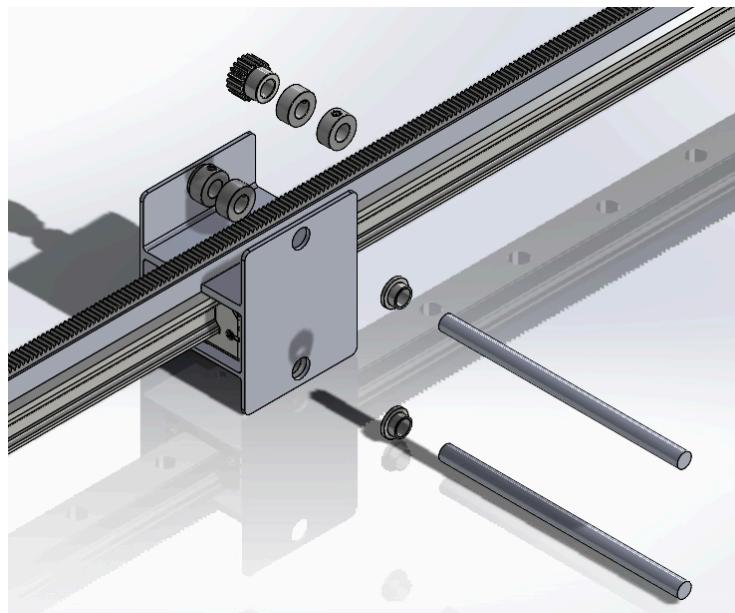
Exploded view of slider box assembly to illustrate assembly techniques.
